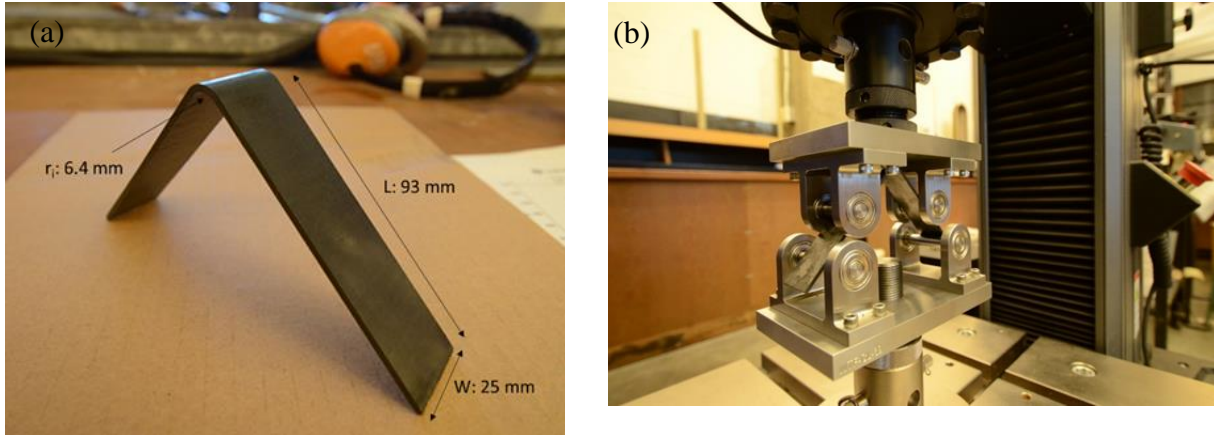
(a) L-shape specimen cut to dimensions (b) Specimen mounted on the test fixture (Courtesy Fortin [128])
